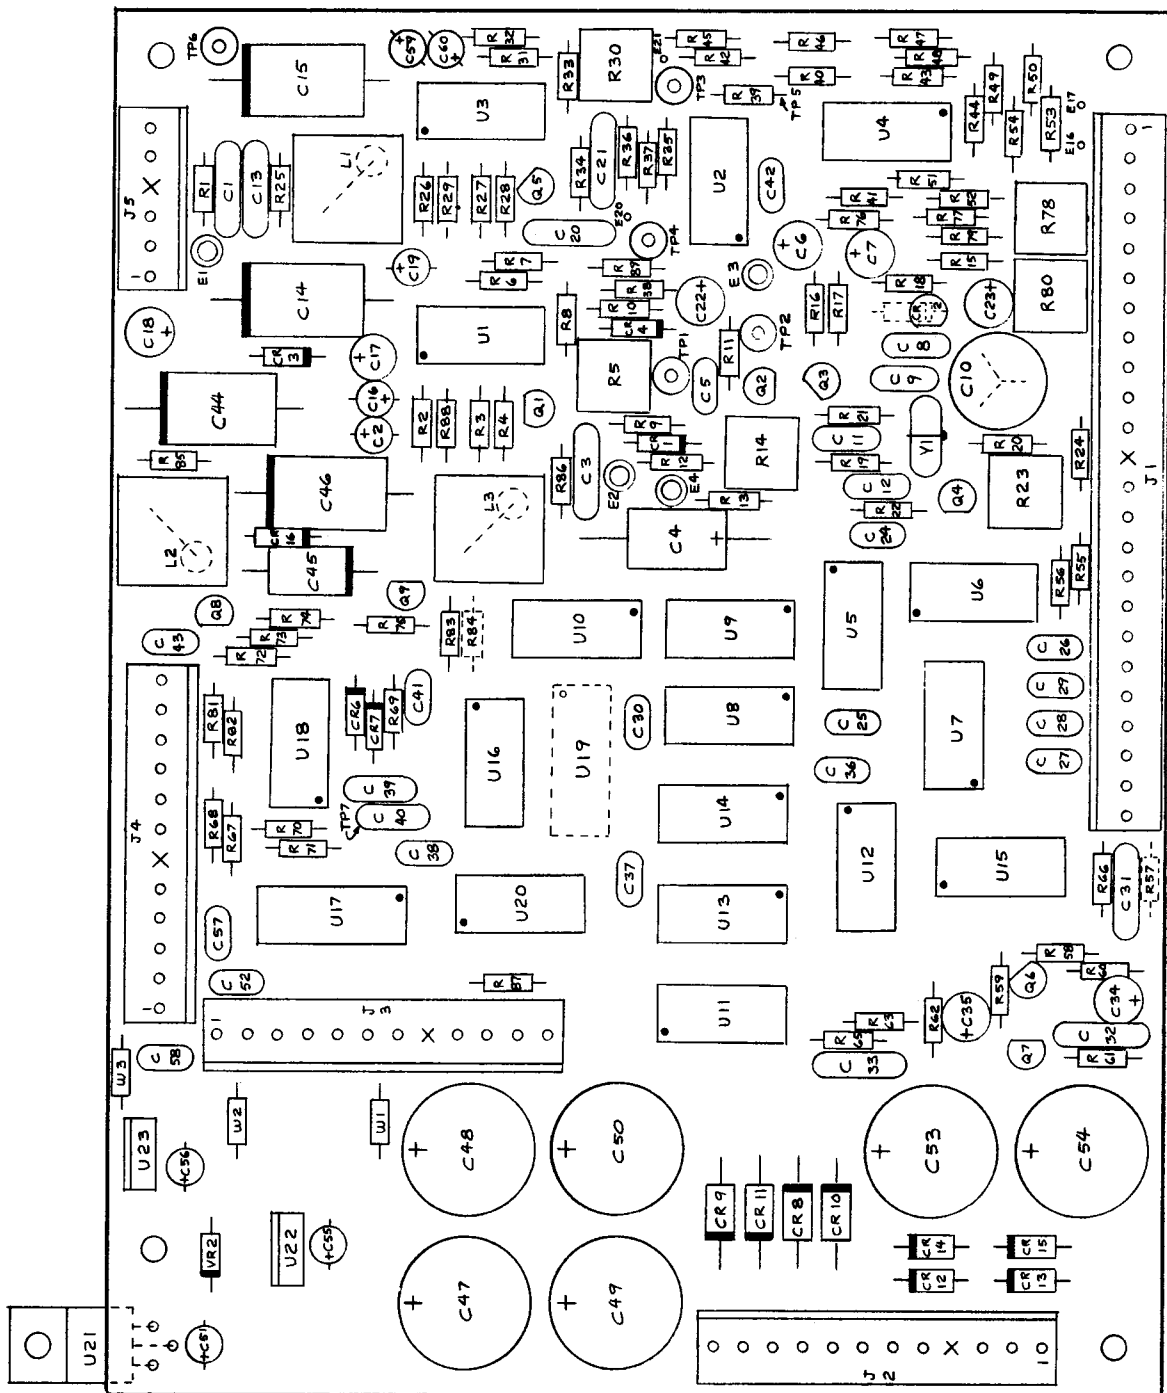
ASSEMBLY DRAWING - A2 RECEIVER
